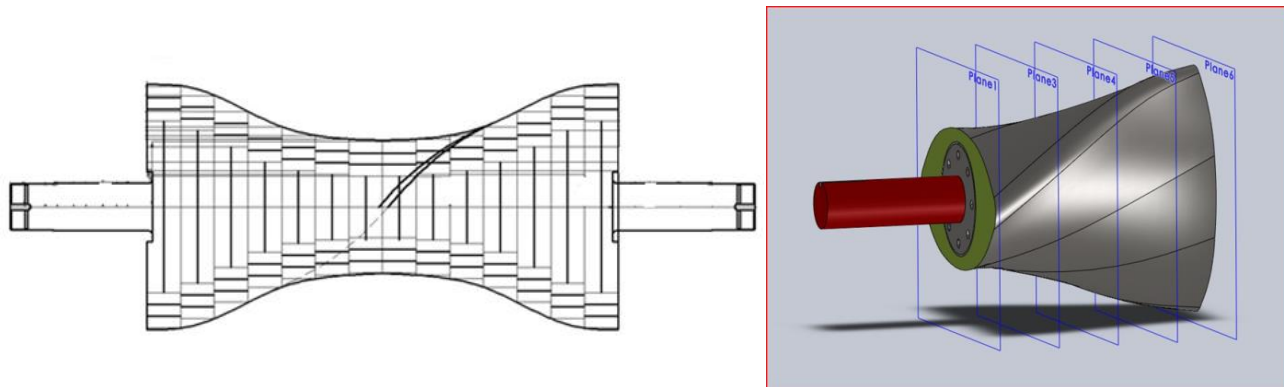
The spindle, divided into 28 blades: a) 2D drawing; b) 3D drawing
